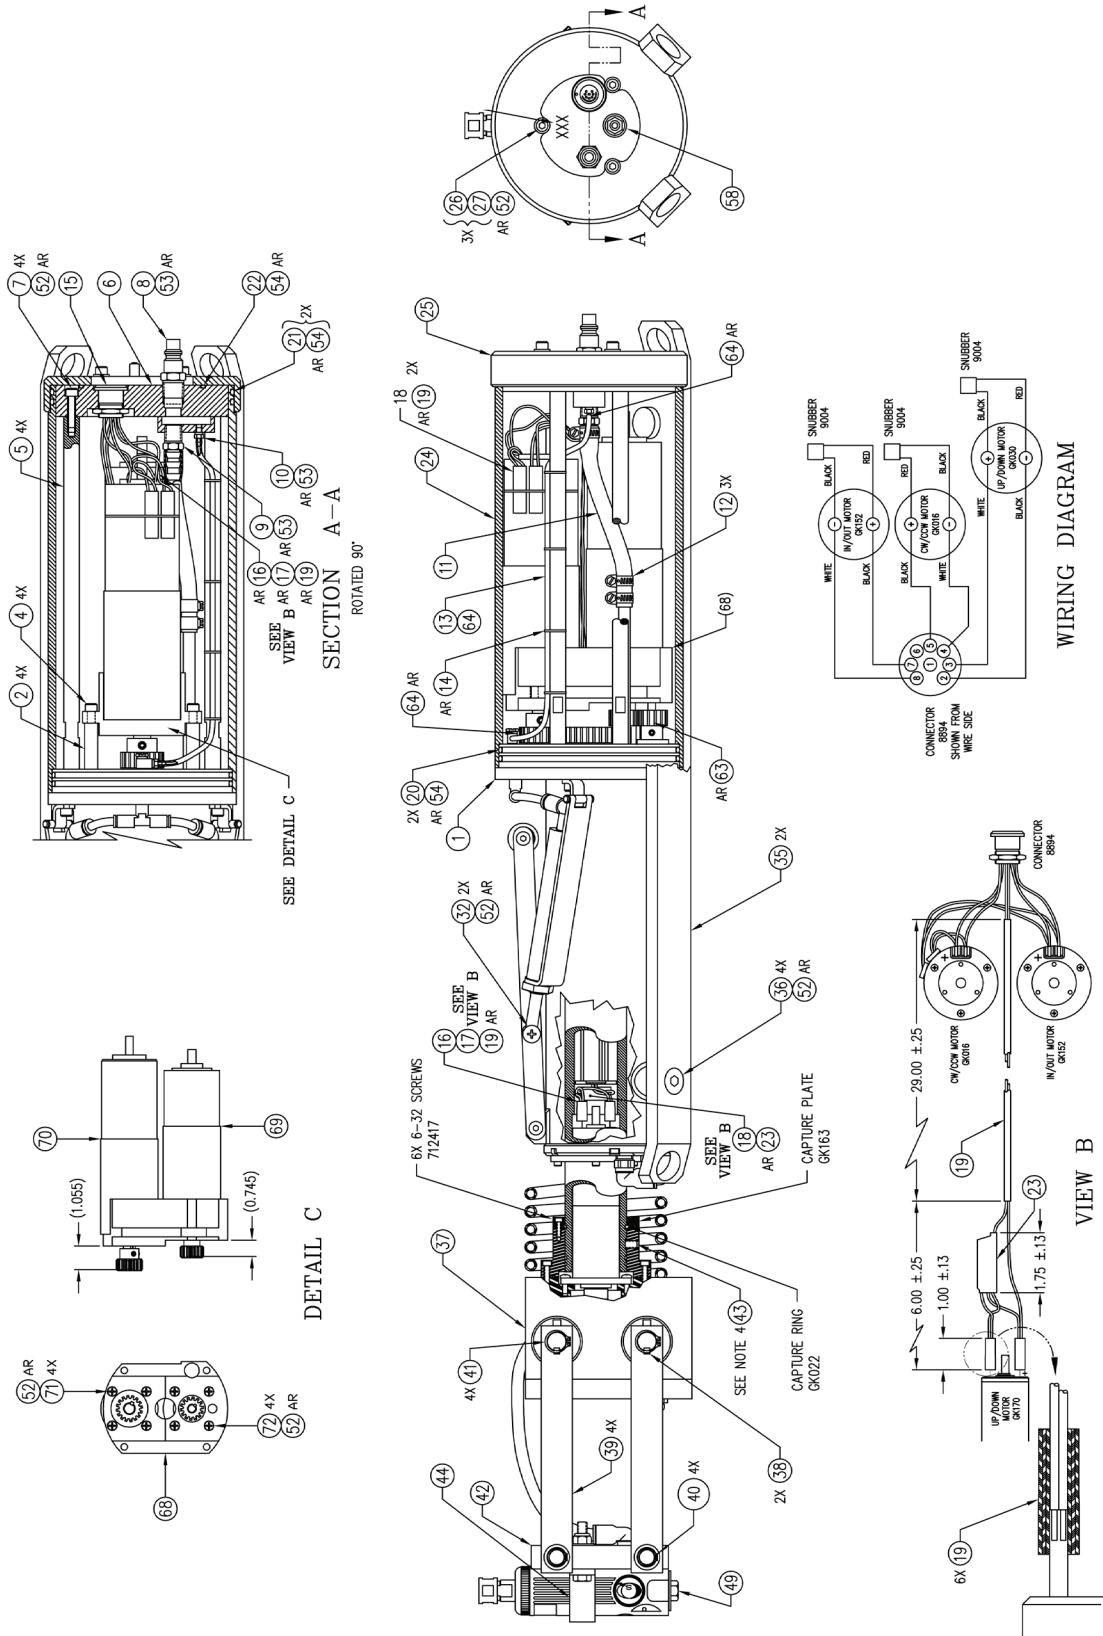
B: ASSEMBLY CUTTER, GIANT KANGAROO, GK400
